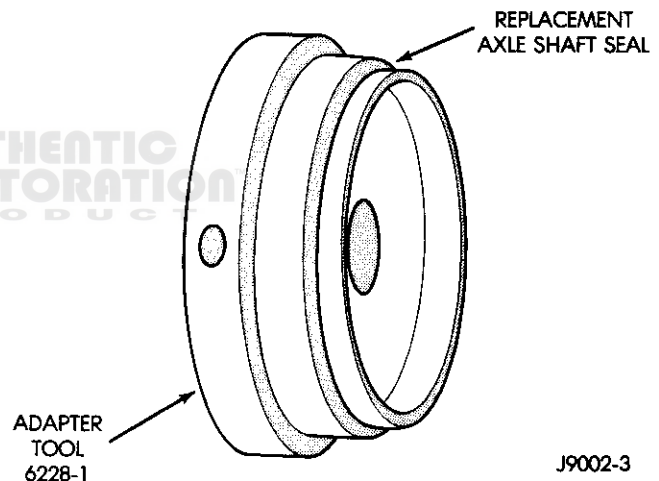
Replacement Axle Shaft Seal & Tool 6228-1
